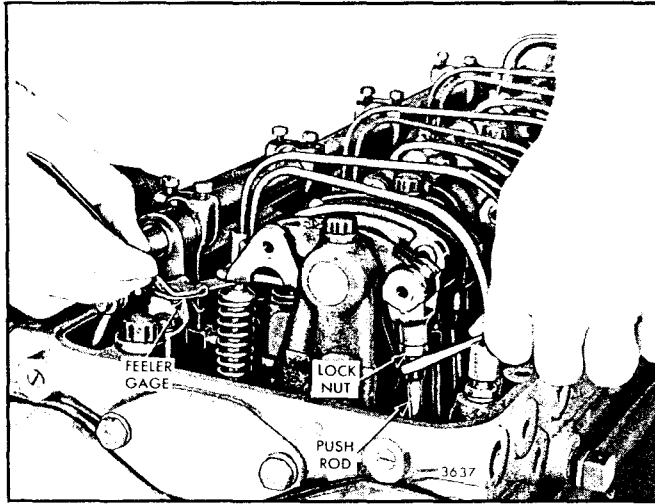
Adjusting Valve Clearance (Four Valve Head)
